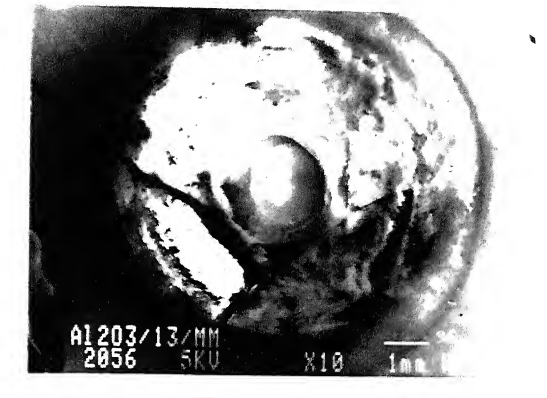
Full view of the max. machined surface tried for through hole. Sample: (13)
